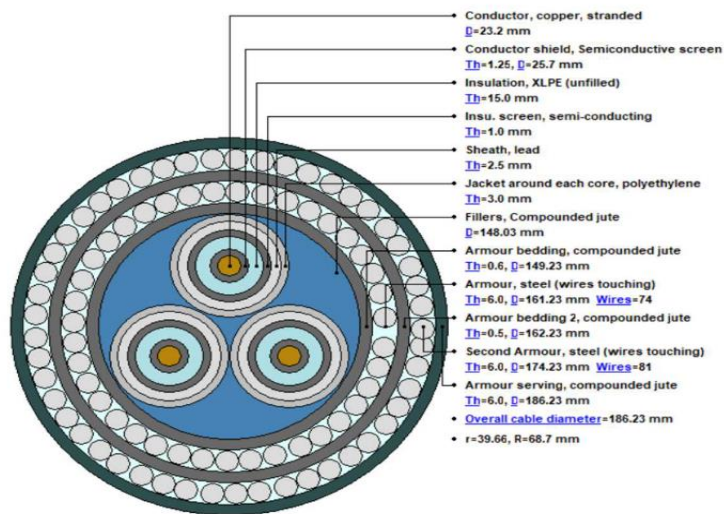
Pemba 132kV cable construction (400mm² copper conductor) (Source: Feasibility Study report, July, 2024)
